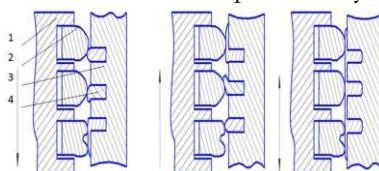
Scheme of formation of the film on the surface of the cylinder liner: 1-piston; 2-piston ring; 3-the cylinder liner; 4-insert
